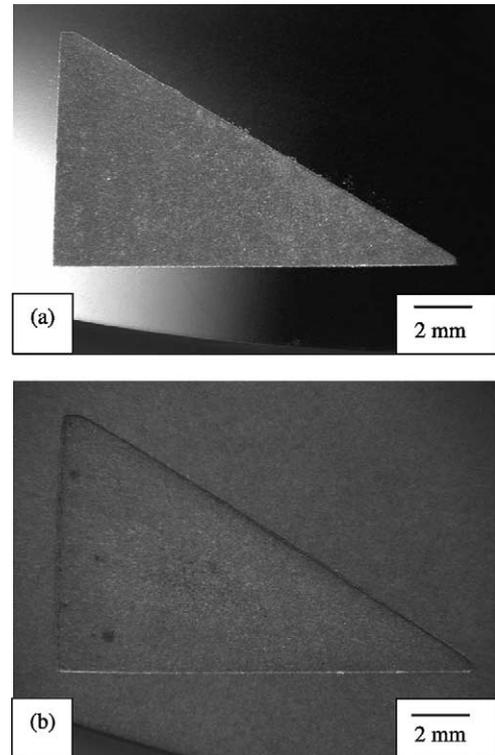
The best workpiece surfaces after EDM: (a) WC and (b) SiC.
